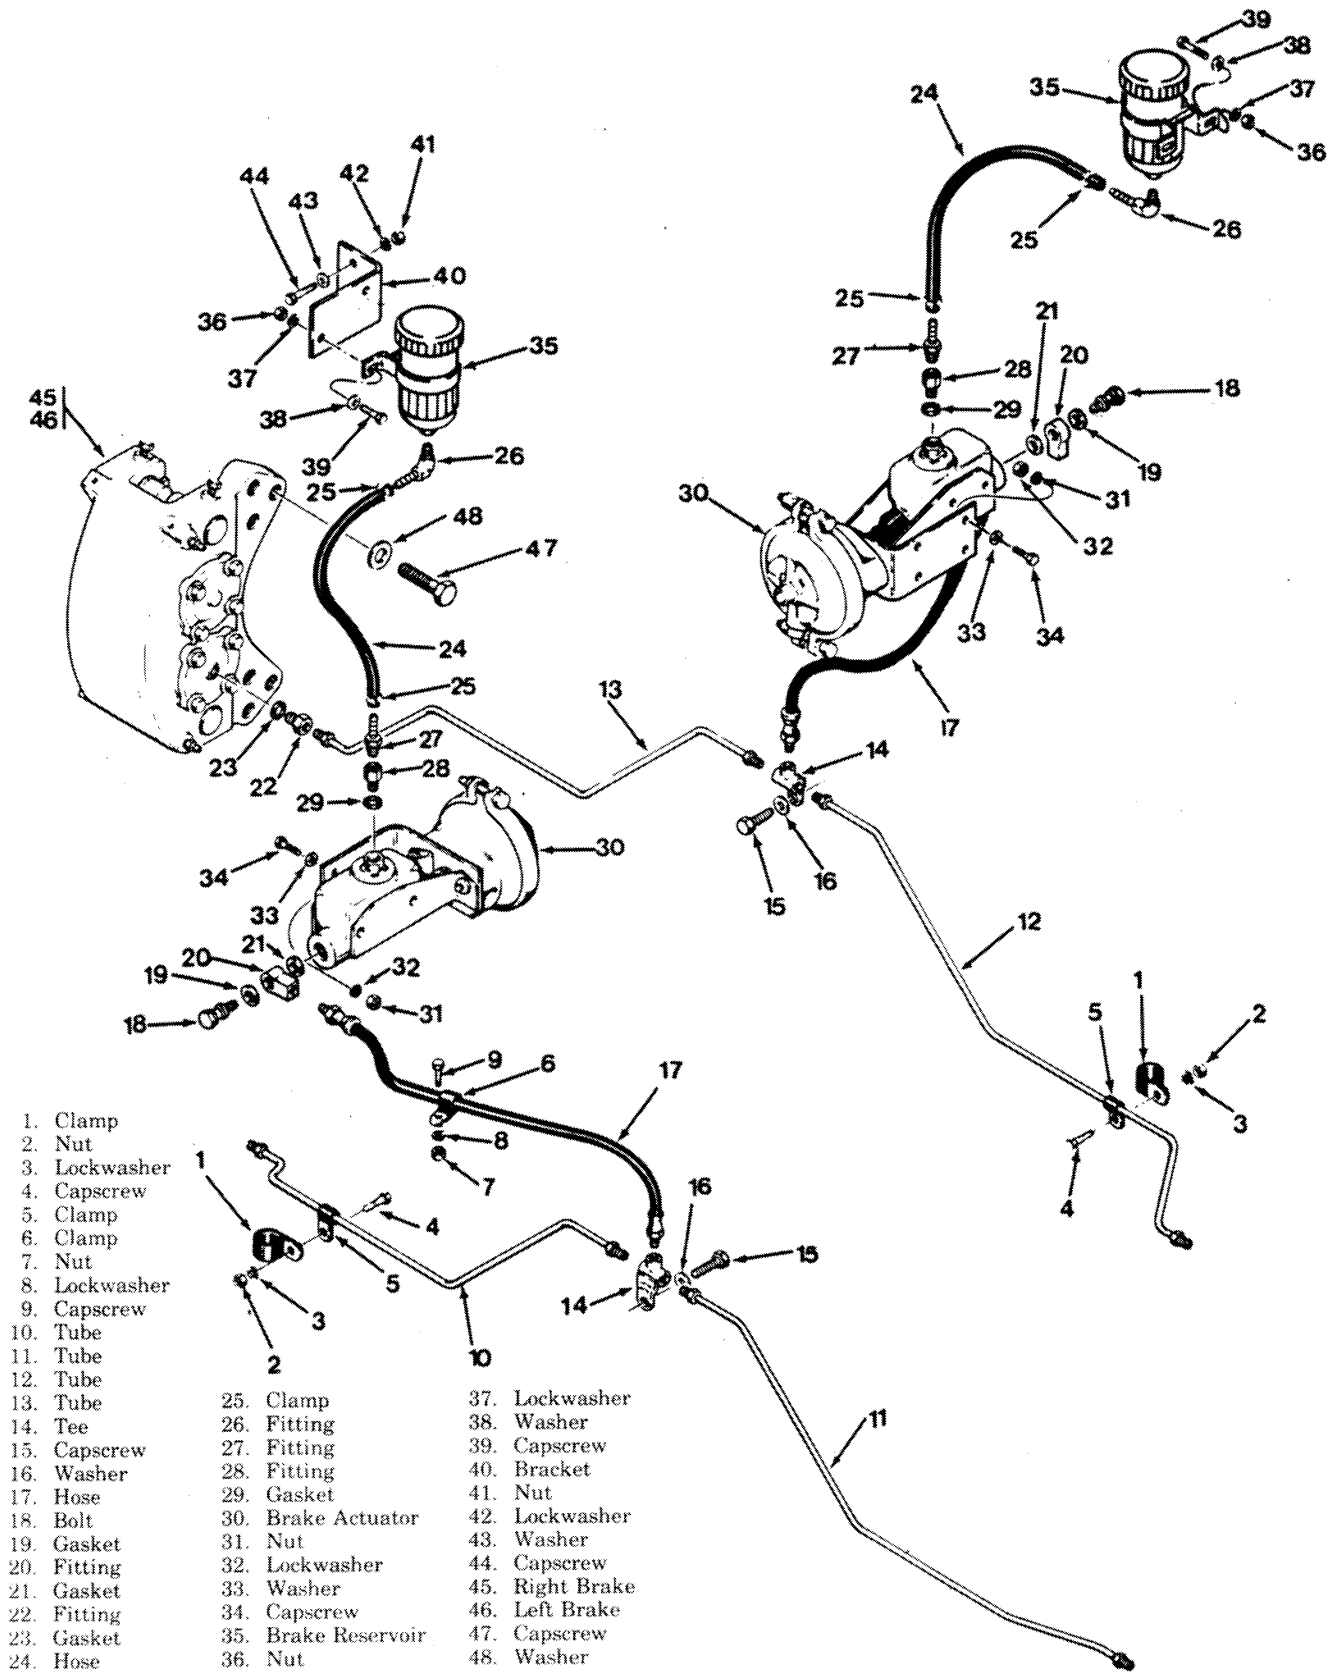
Brake Actuator to Wheel Cylinders Group
